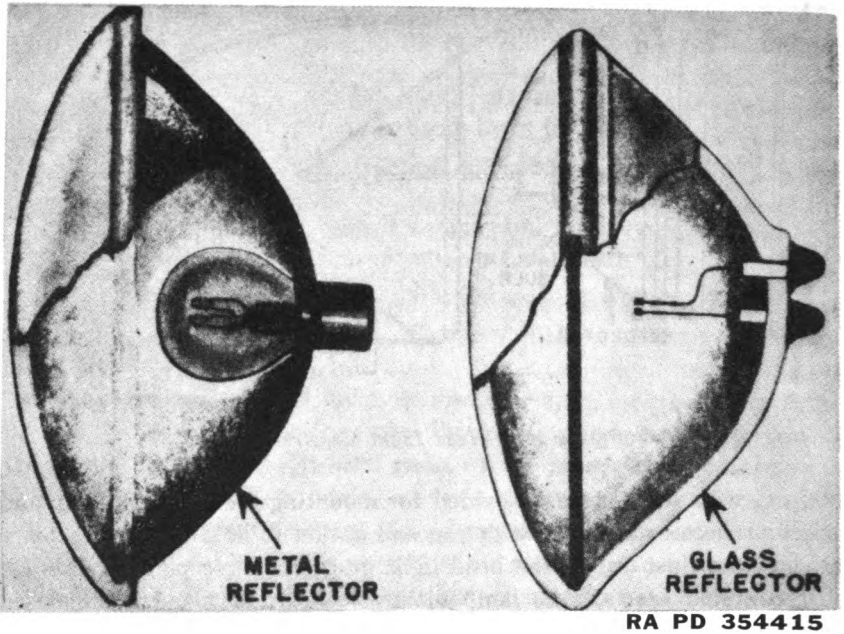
Sectional Views of Sealed Beam Head Light Lamp-units.
